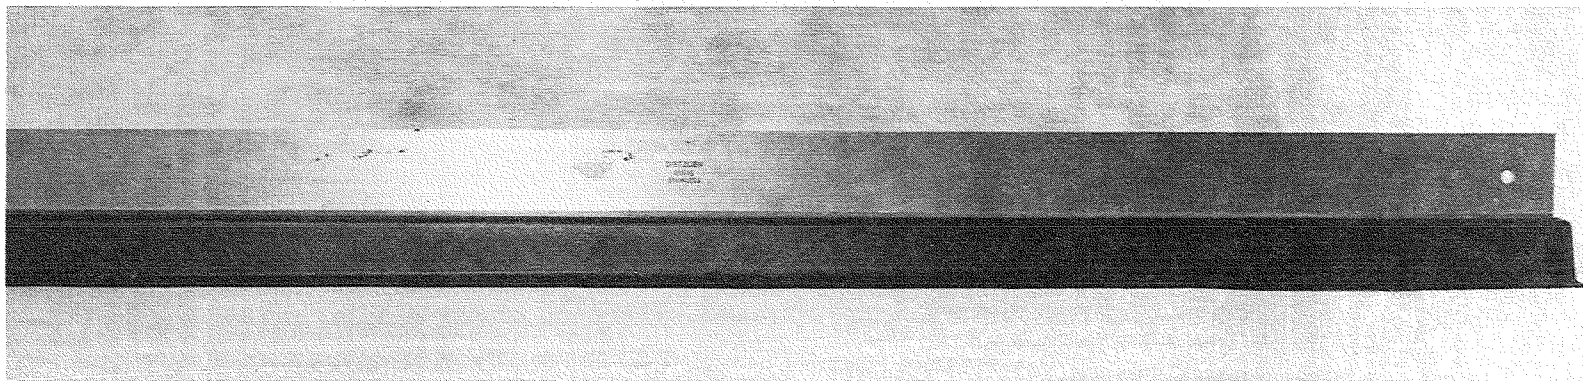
"Hat" Stringer Molded on Reverse Formed Tool—Showing Flat Condition
